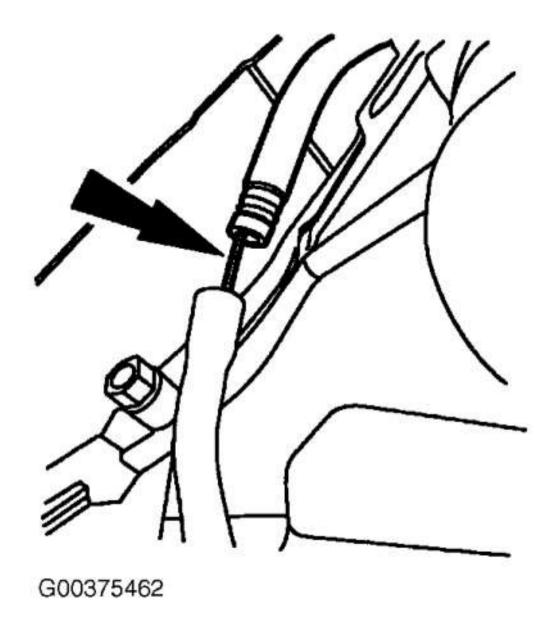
Aligning Fluid Filler Tube Courtesy of FORD MOTOR CO.
